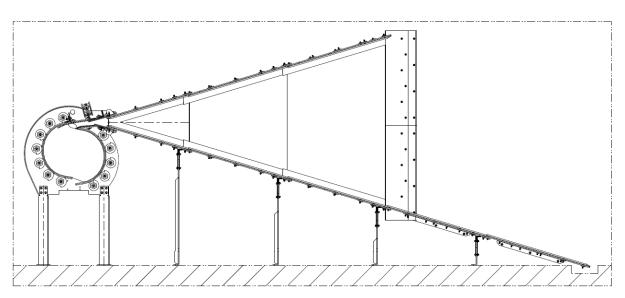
3X5 TRAP PLATE LAYOUT
